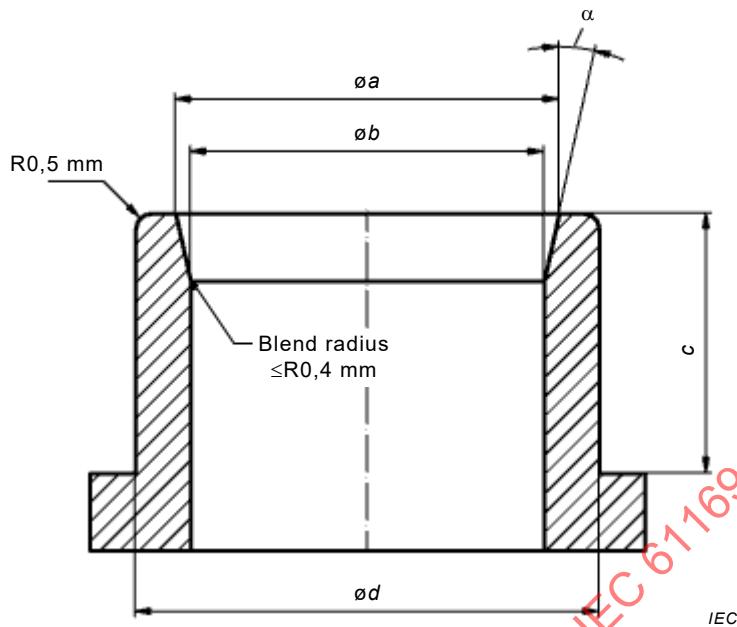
Gauge rings for socket outer contact (for dimensions see Table 4)
